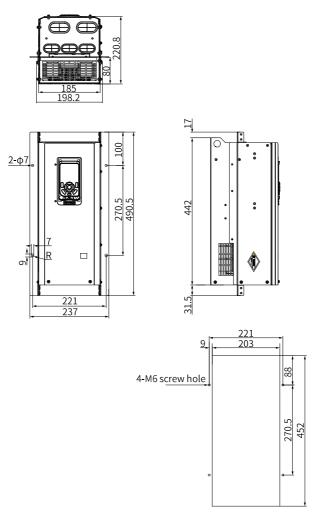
Mounting-hole dimensions (mm) of MD580-AZJ-A2T4
